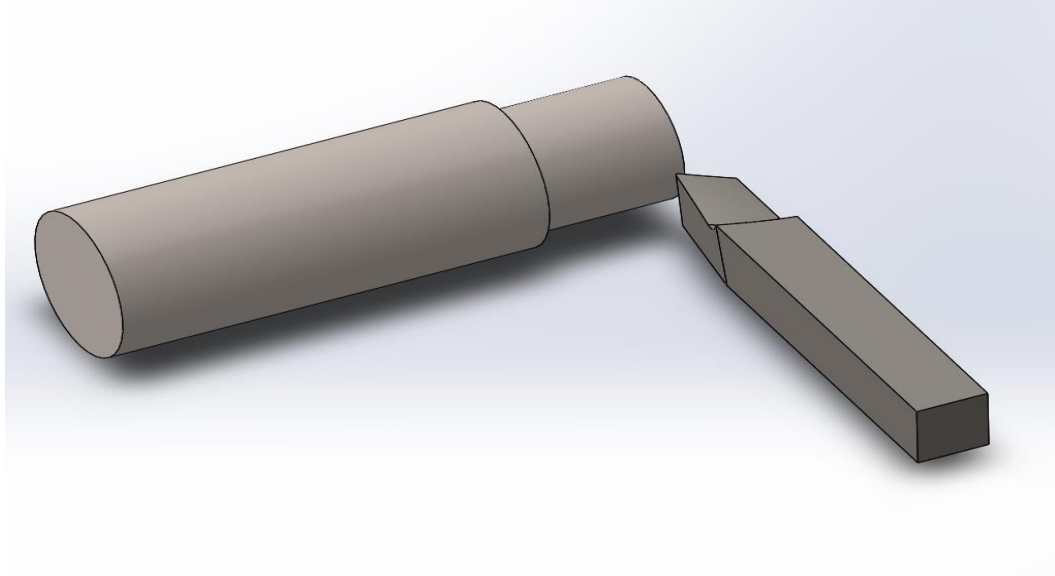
A 3D model assembly of the cutting tool and the workpiece
